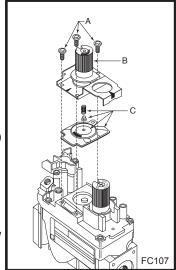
Remove mounting screws, pressure regulator tower and spring and diaphragm assembly.
